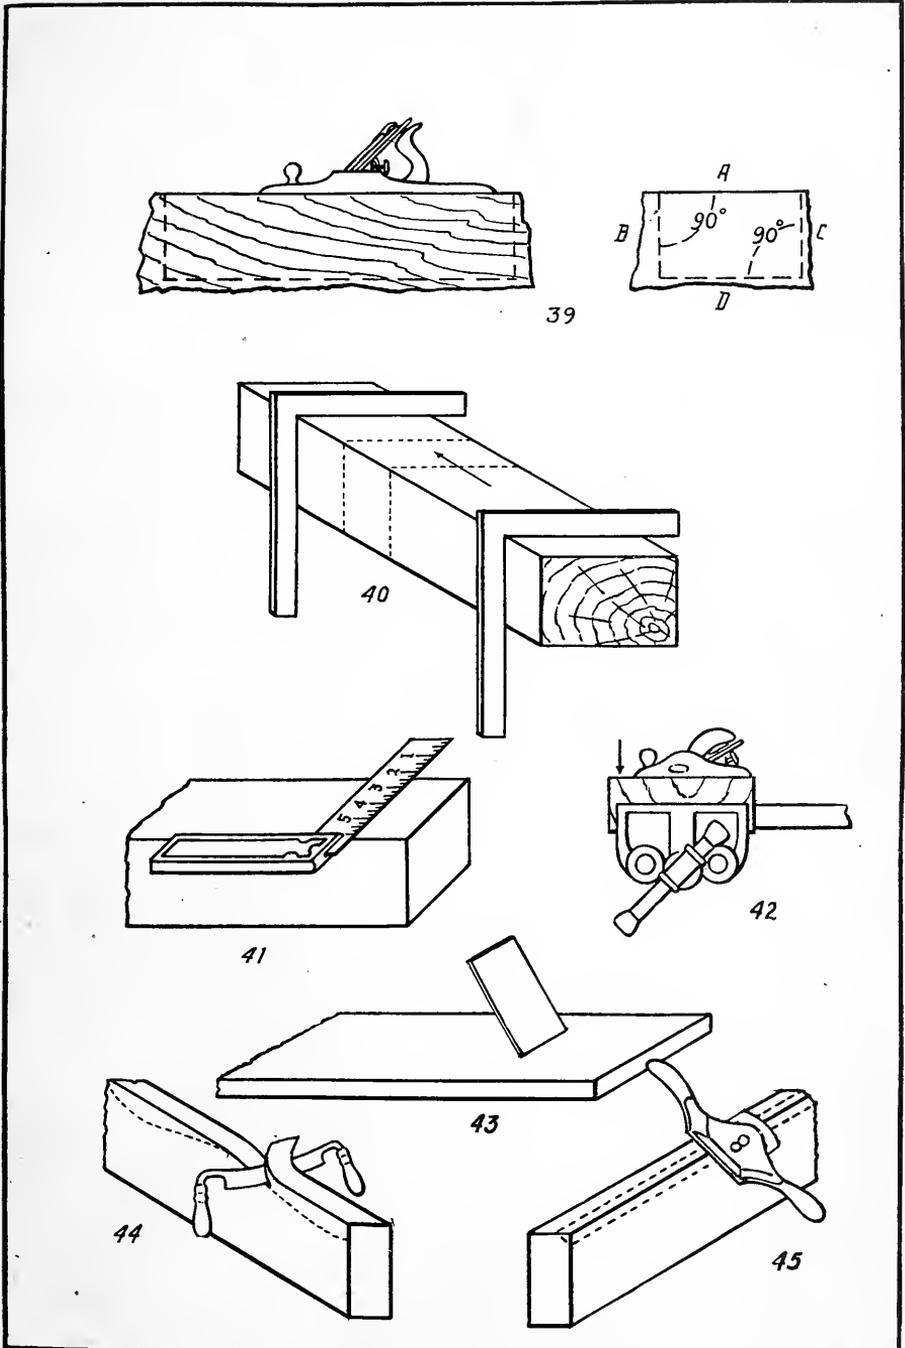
SQUARING STOCK. FIG. 40.—TESTING WITH SQUARE. FIG. 41.—MARKING END. FIG. 43.—USE OF CABINET SCRAPER. FIG. 44.—USE OF DRAW KNIFE. FIG. 45.—USE OF SPOKE SHAVE.
